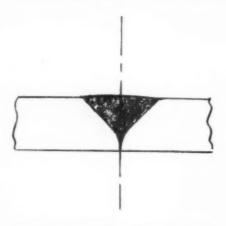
, above, a butt joint of two ½-inch plates, bevelled ½ inch x 45°, making a section area of .14 inches. Where hand welding might require more than 2 hours, per 100 inches, Unionmelt speeds the job to less than 8 minutes.
